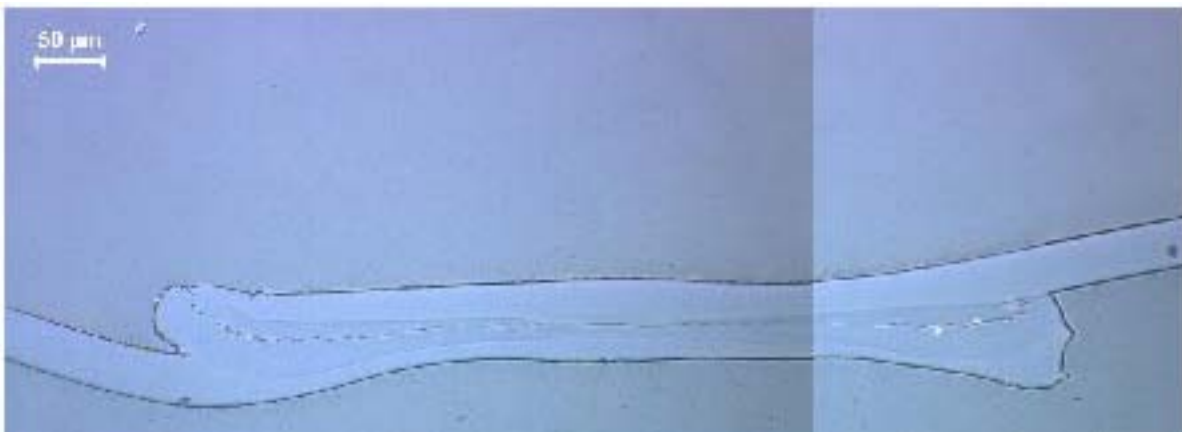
Cross section of a welded seam where the two sides of the strips are fused.
